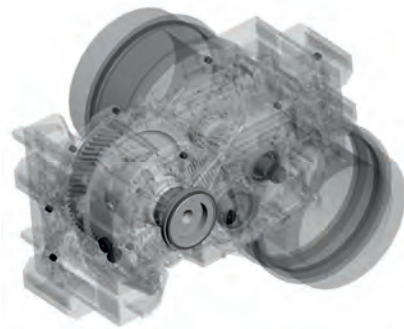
Model of the 2-Speed AMT Gearbox made in SMT Masta
